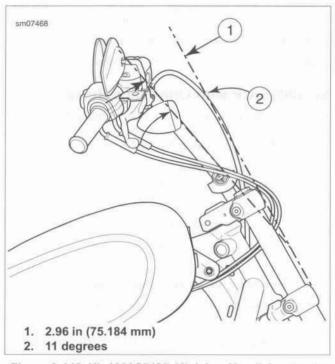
XL 1200CP/CB Mini-Ape Handlebar Angle
